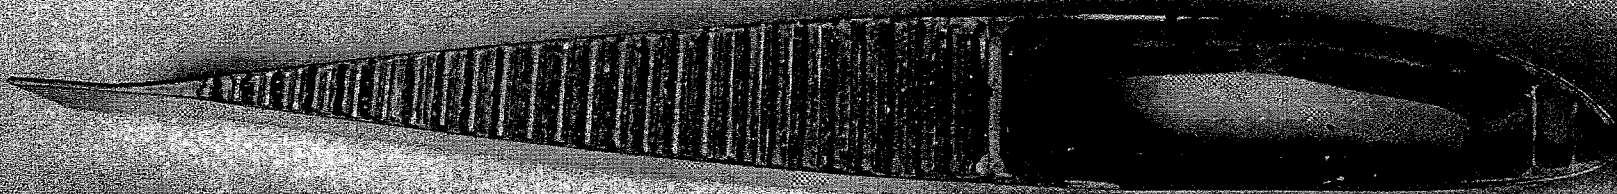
PHOTO OF CH-46 BLADE CROSS SECTION ILLUSTRATING
